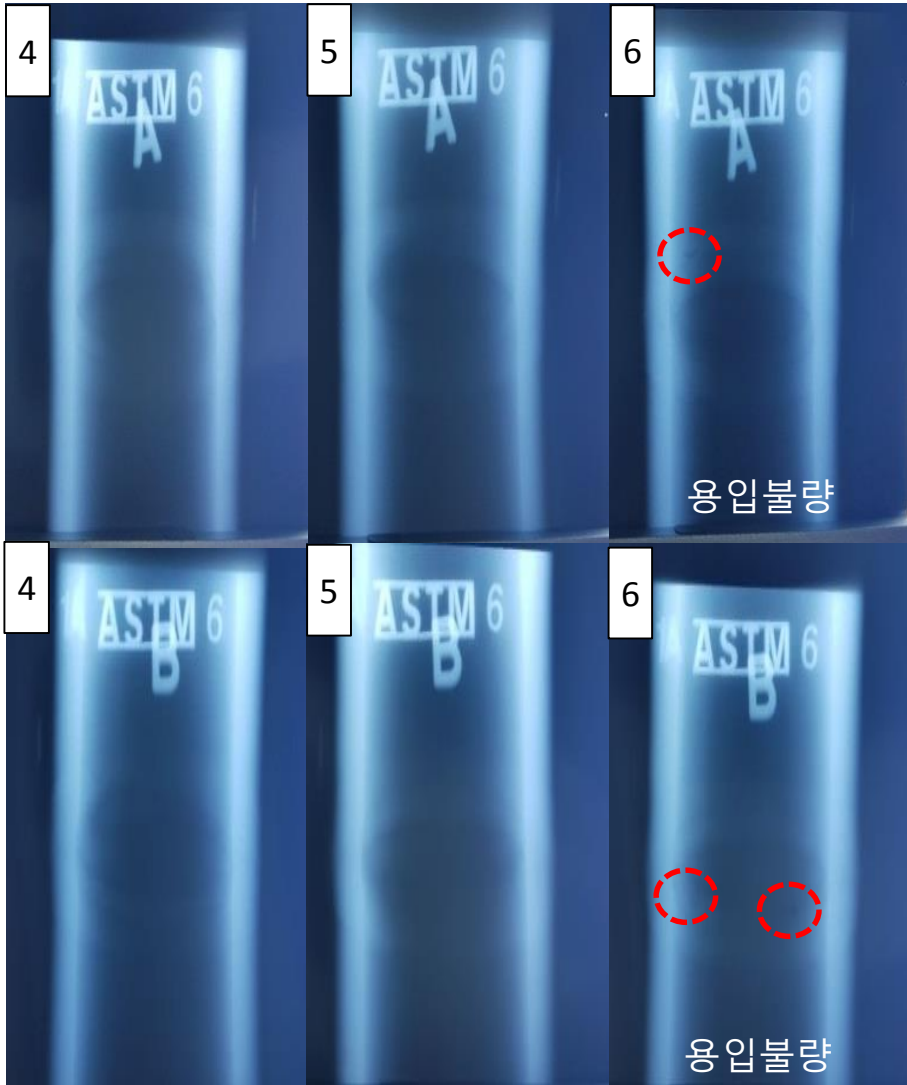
Radiography Test Film for Coupons welded at Peak Current 170A
